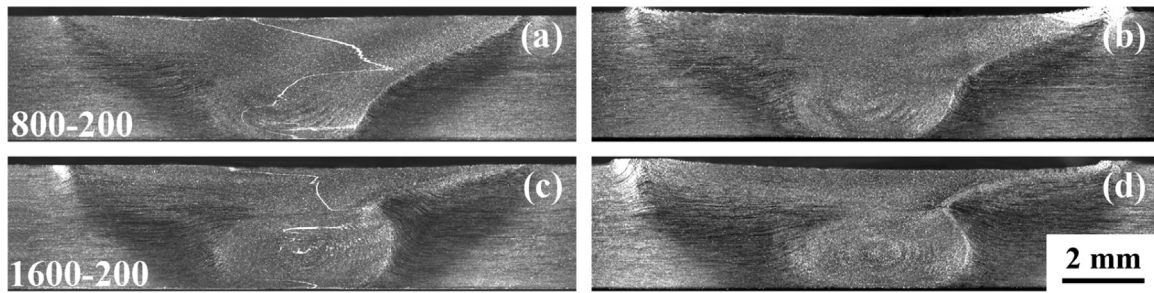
Cross-sectional macrographs of FSW 2198-T8 welds (rpm-mm/min): (a) and (c) butt welds; (b) and (d) bead-on-plate welds.
